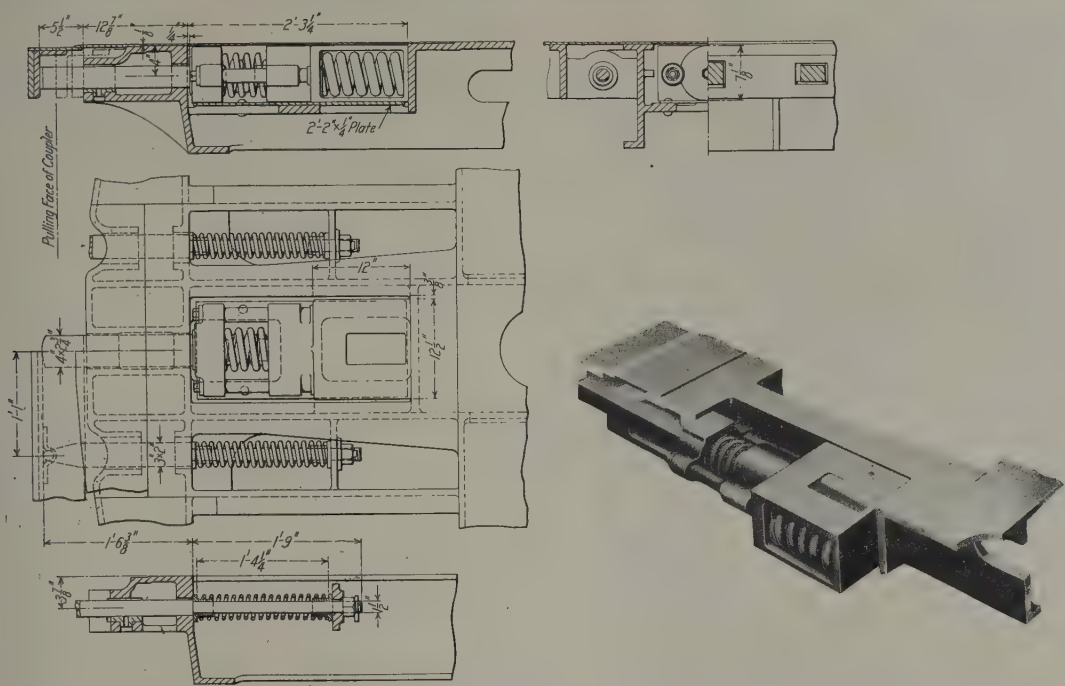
Miner Friction Buffer for Passenger Equipment with Cast Steel Platforms. W. H. Miner.
